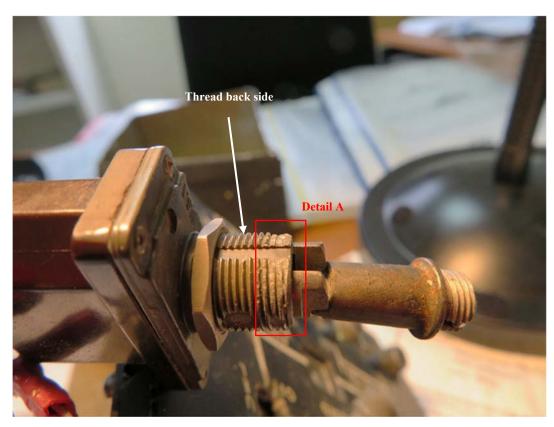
The thread on the rear section of the right engine fuel shut off valve switch.
